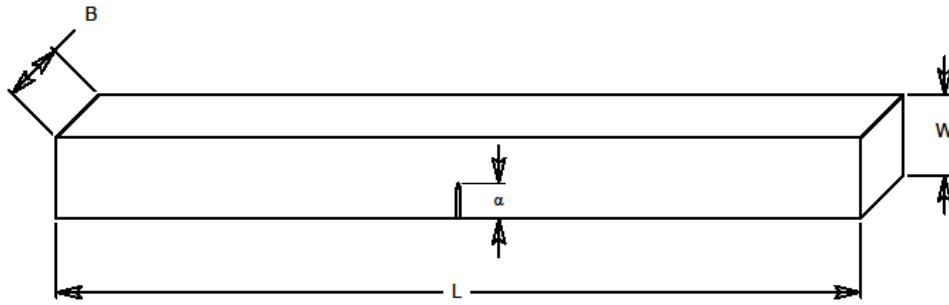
Specimen configuration showing dimensions L, W, B, and a.
